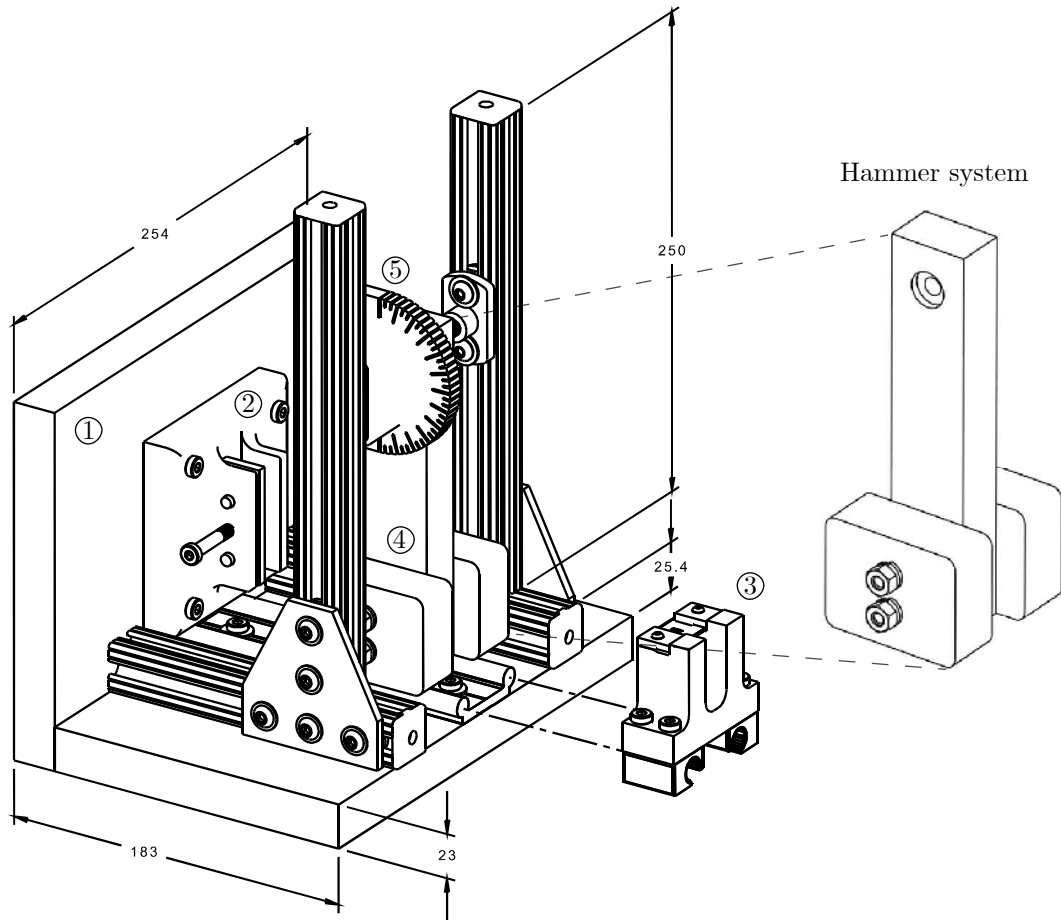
Pre-cracking pendulum assembly for the fracture specimens' controlled notching. The framework includes a wooden platform (1) for stable positioning, a specimen (2) and a blade (3) holder for the precise pre-cracking, a hammer system (4) with a graduated scale (5) to select the impact force, and a magnifying glass for the careful alignment with the specimens midplane. The dimensions are in millimeters.
